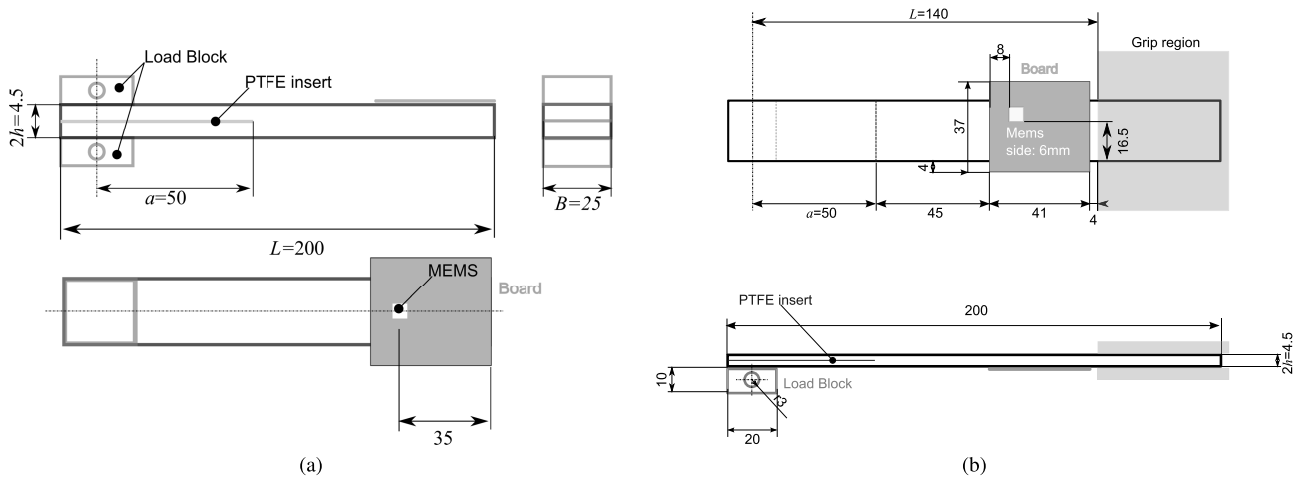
Dimensions (in mm) of the samples and board position: (a) DCB and (b) ELS.
